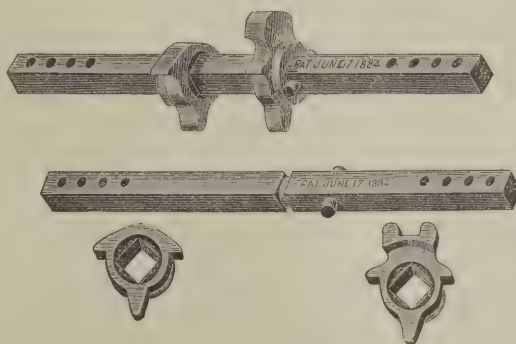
Steel Swivel Spindle 5-16 Inch, with Reversible Hub.
